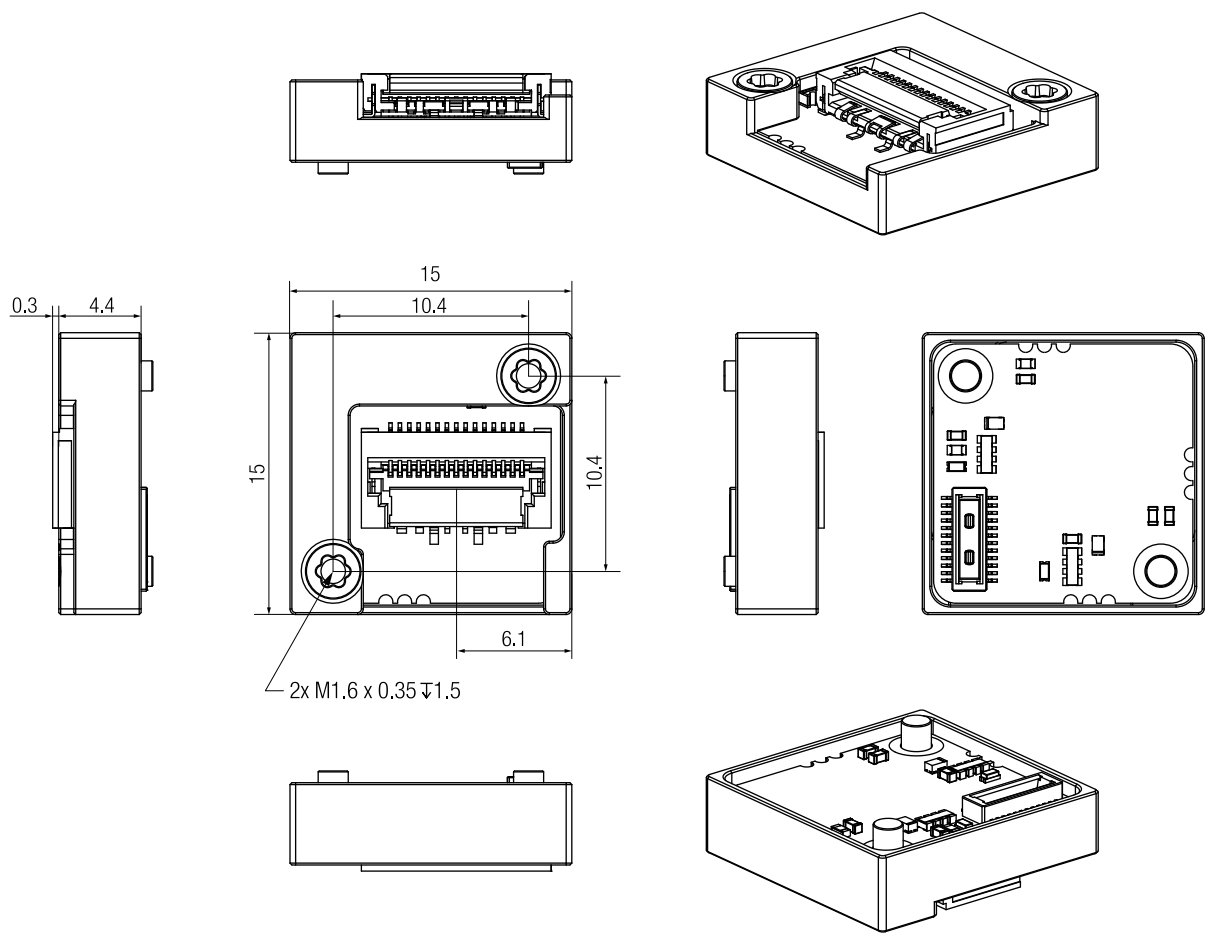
Dimensional drawing of ADPT-MU-CX3-FL
